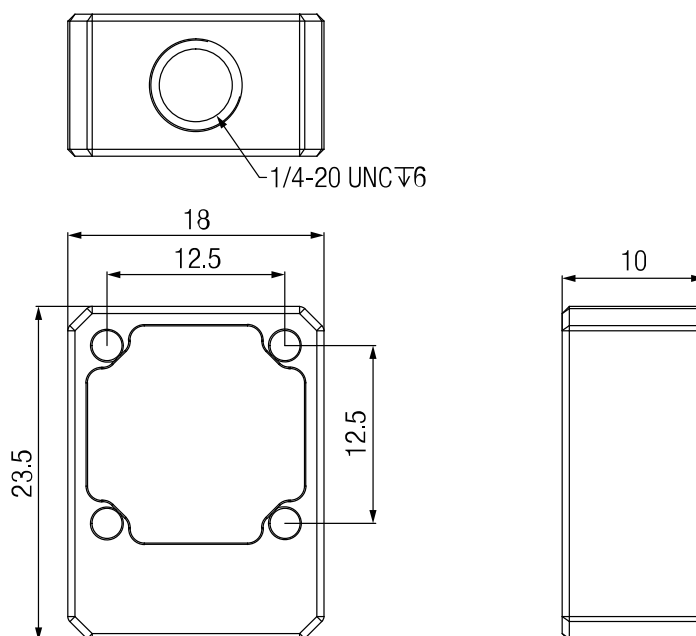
Dimensional drawing of ME-ADPT-MU-T
